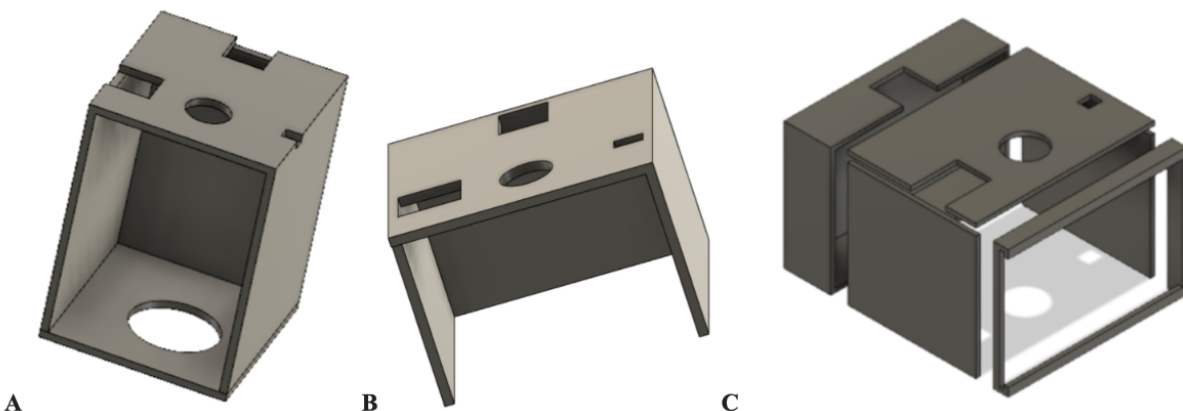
Iterations of the environmental chamber design. The three panels show the iterations of our CAD drawings of the environmental chamber. (A) Panel A shows the first iteration, which has five sides, including a bottom piece. (B) Panel B shows the bottom piece removed, as it was deemed unnecessary. (C) Panel C shows the final design, which was split into five individual pieces for laser cutting and 3D printing.
